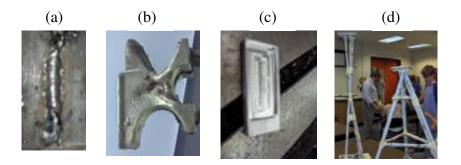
Outcomes of hands on activities by students: (a) Welding, (b) Casting, (c) Milling and (d) Project
